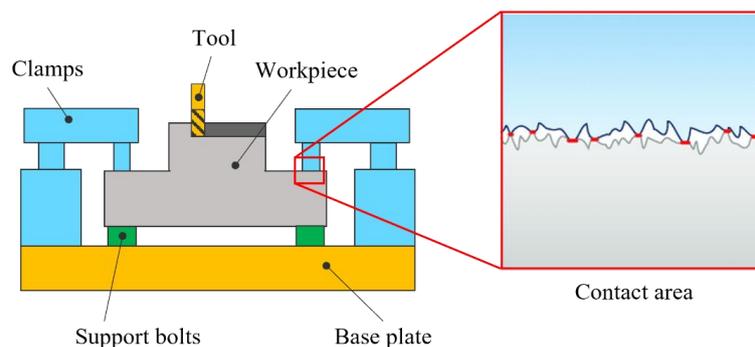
Illustration of the contact area between the workpiece and clamping elements
